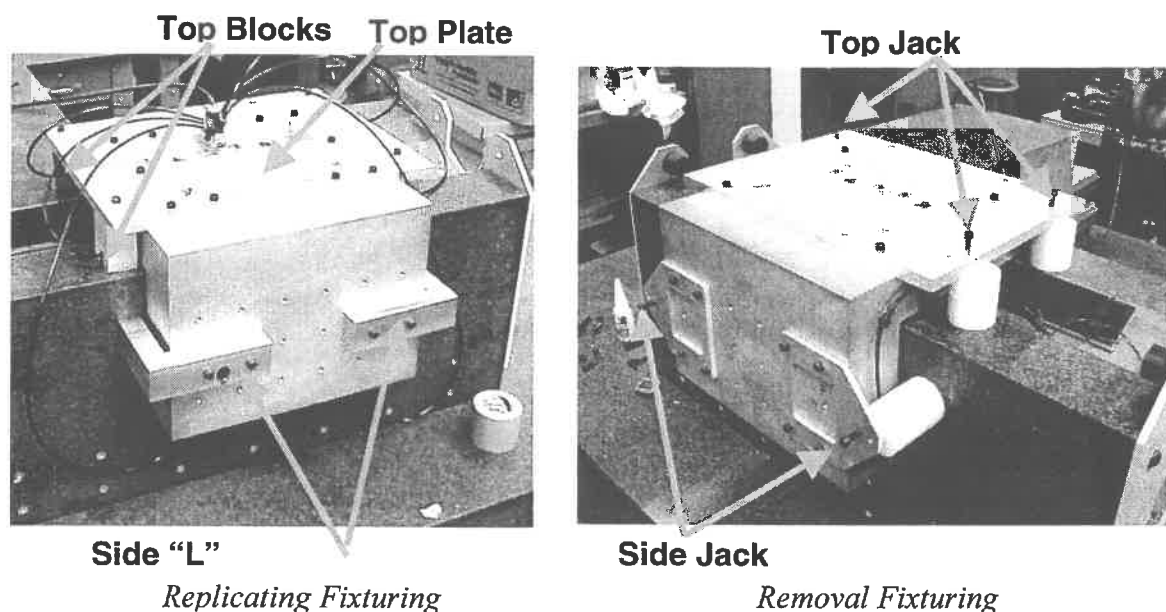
The replicating fixturing (left) allowed the assembly of the Axtrusion prototype in 2 hours. The jacks on the removal fixturing (right) are used to draw the motor coil away from the magnets enough to be able to remove the carriage from the way.
